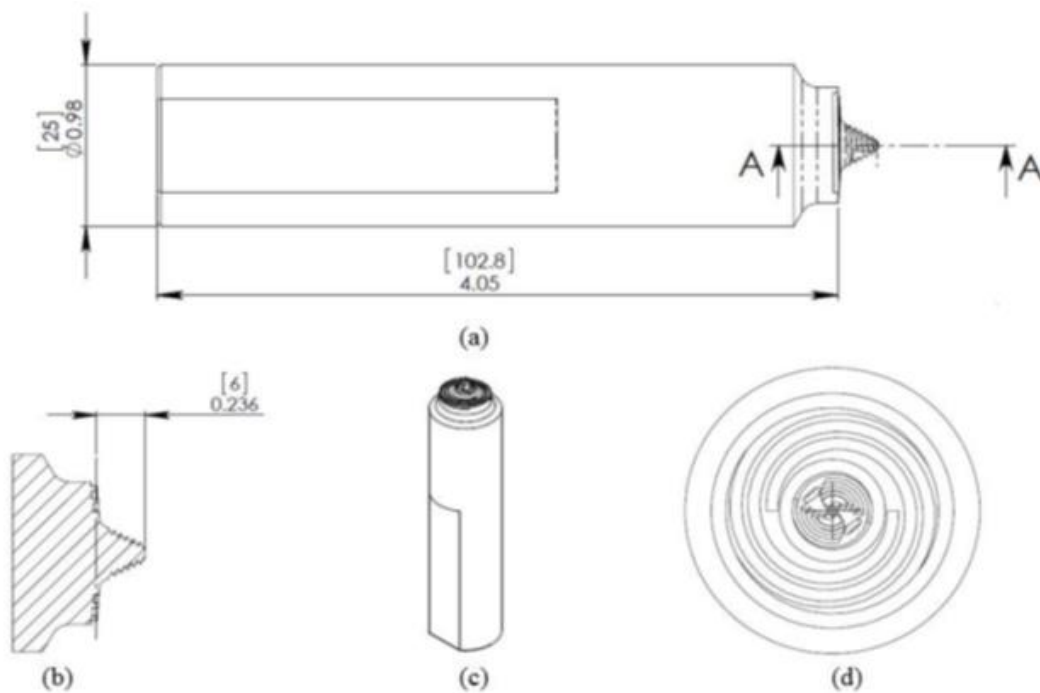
(a) Tool length of 102.8 mm; (b) Pin length of 6 mm; (c) Fixed tool design; (d) Scrolled shoulder with two flutes
